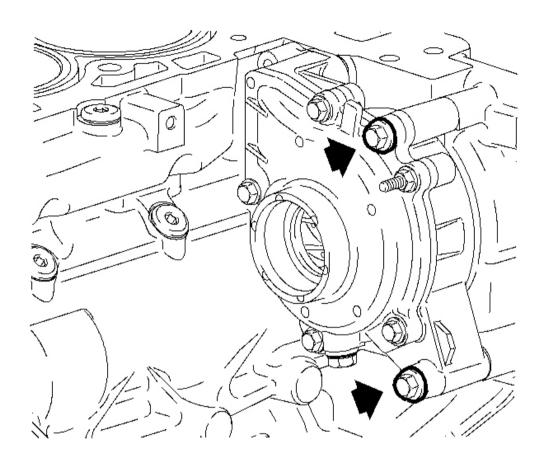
View Of 2 Rear Water Pump Assembly Bolts Courtesy of GENERAL MOTORS CORP.
